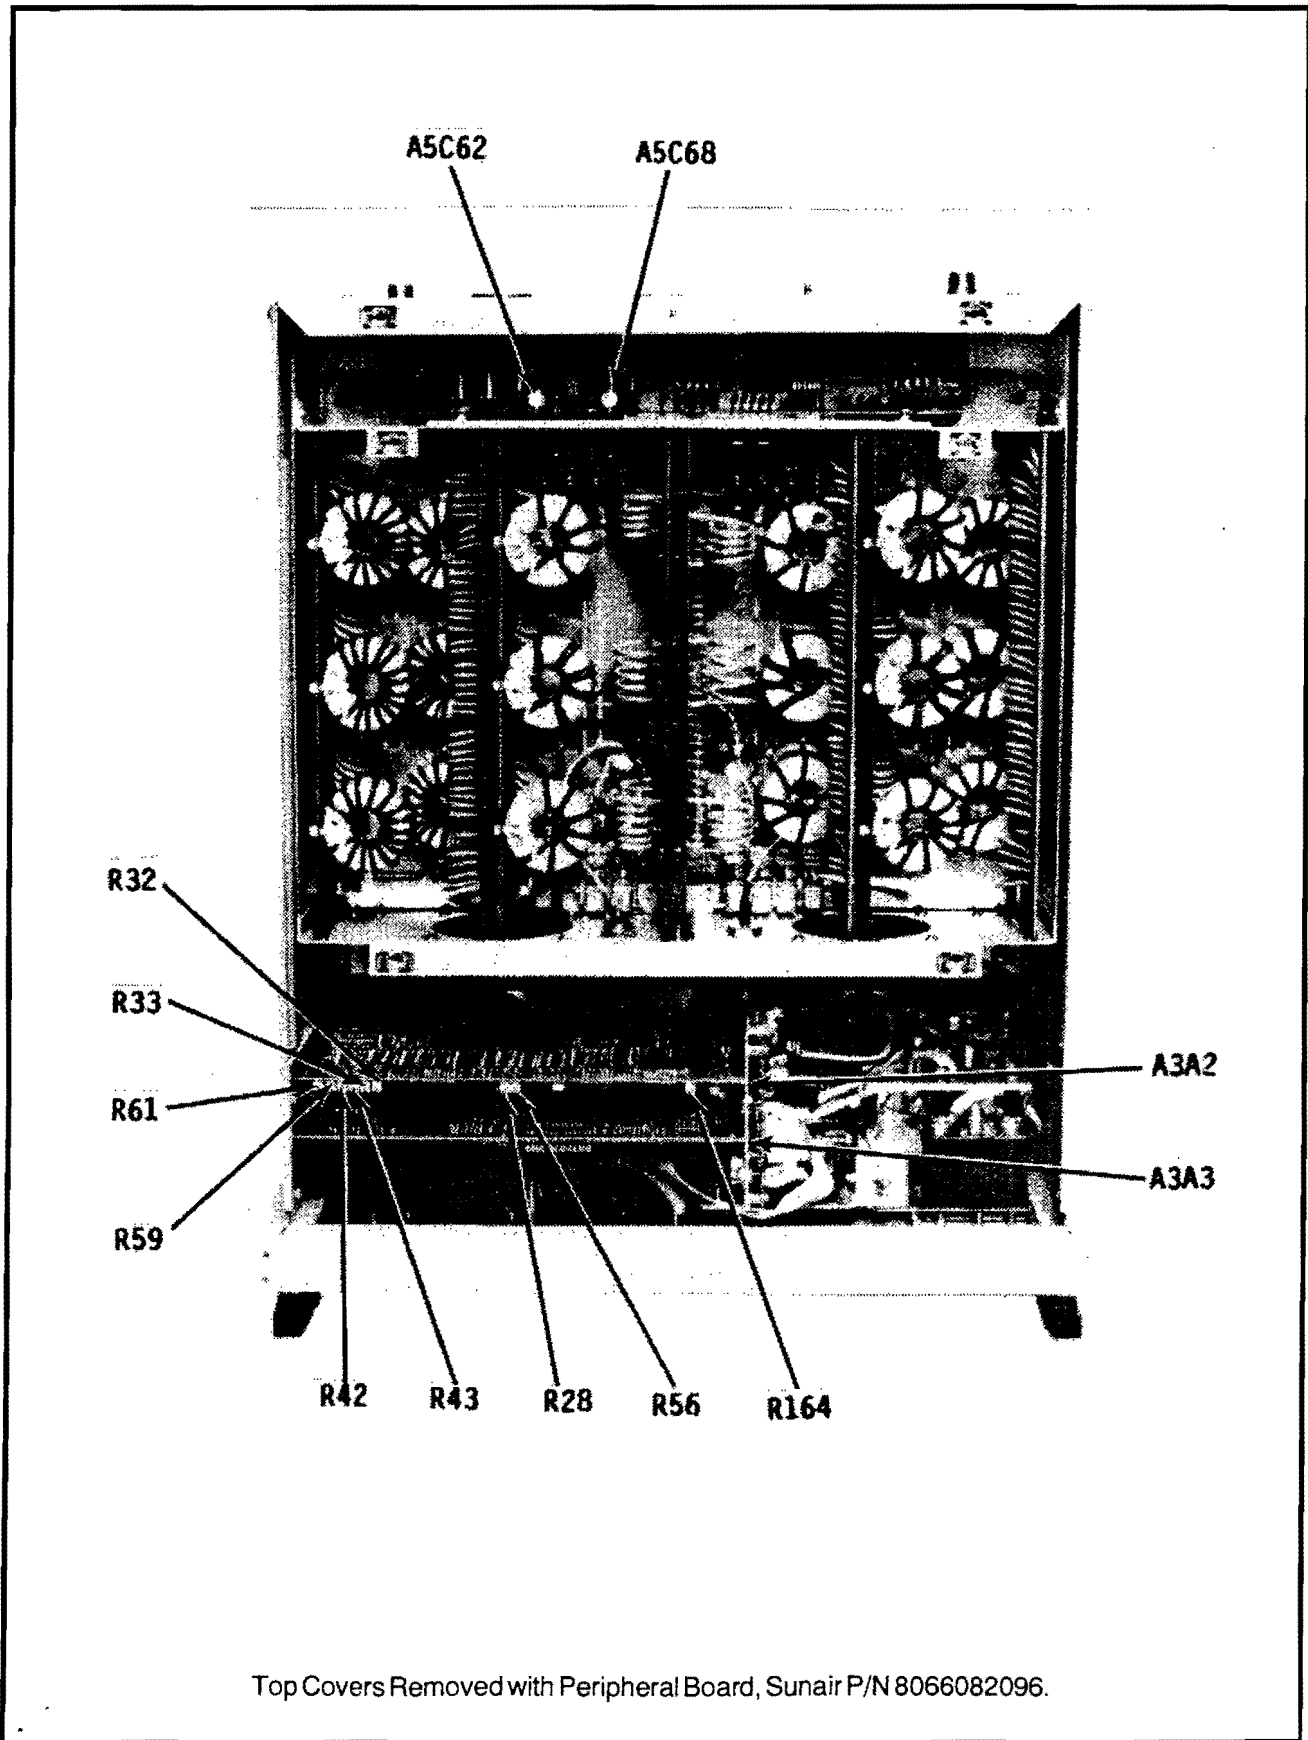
(Sheet 1/8) Major Assembly Locations.
